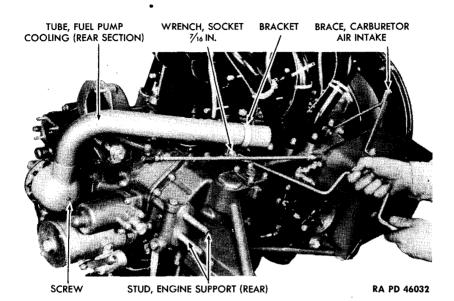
Removing Rear Section of Fuel Pump Cooling Tube
